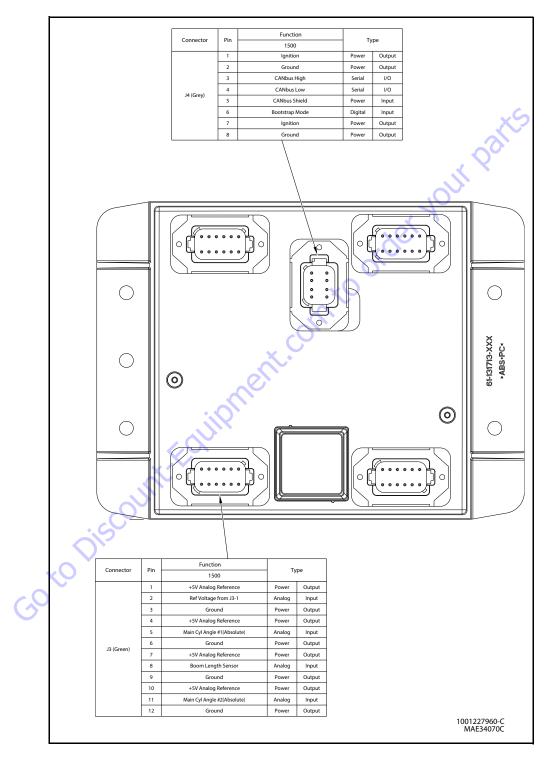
BLAM Control Module - Sheet 2 of 2
